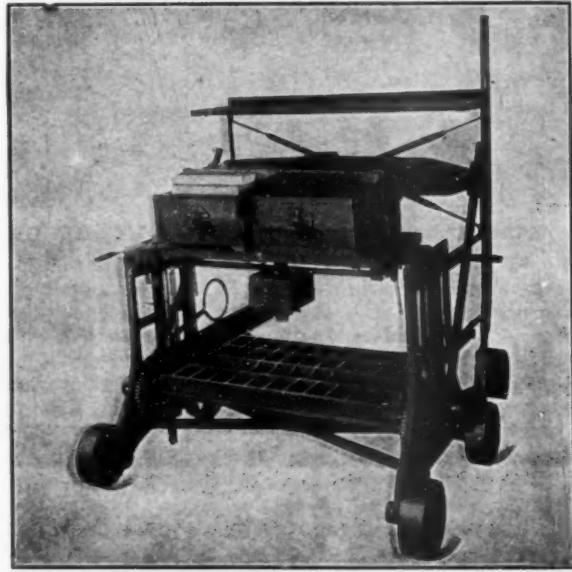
shows the flasks clamped ready to roll over after being squeezed. The hand lever controlling the movement of the squeezer head is shown at the right.
